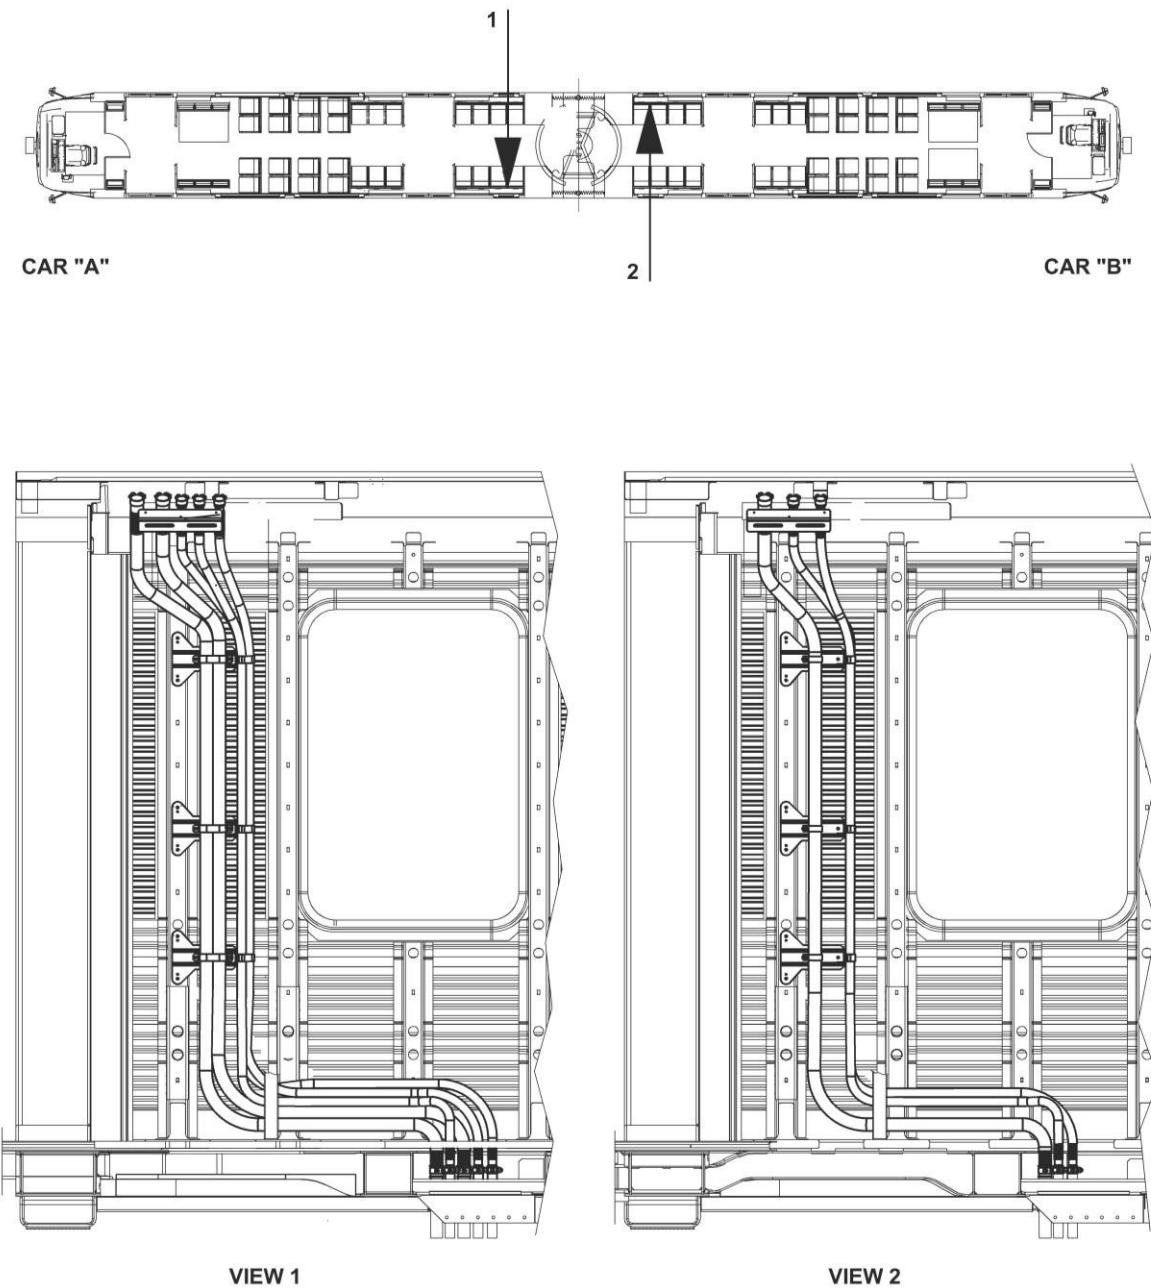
I-02.35 A Body section Underframe - HV Cabling Layout
